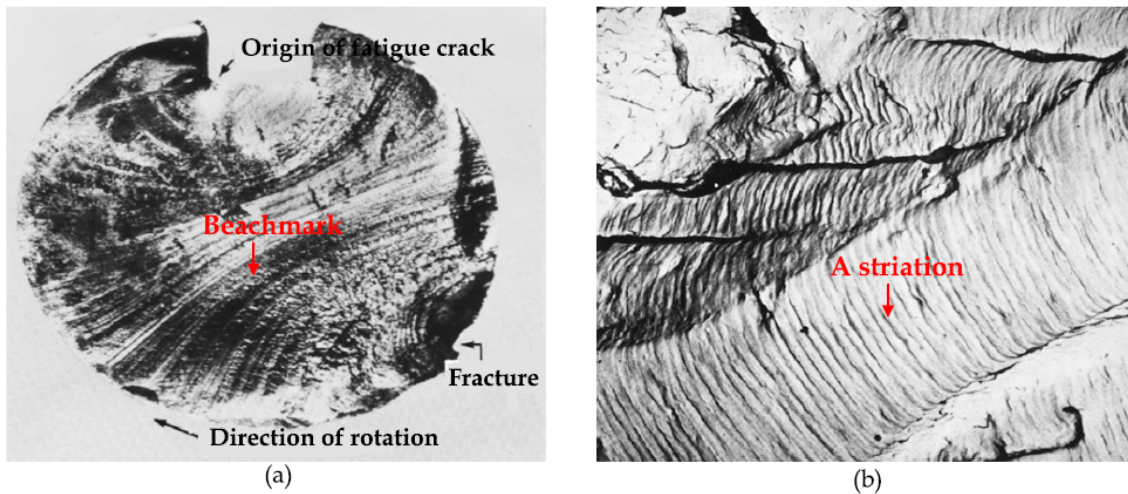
Fatigue fracture surface of steel shaft [3]
